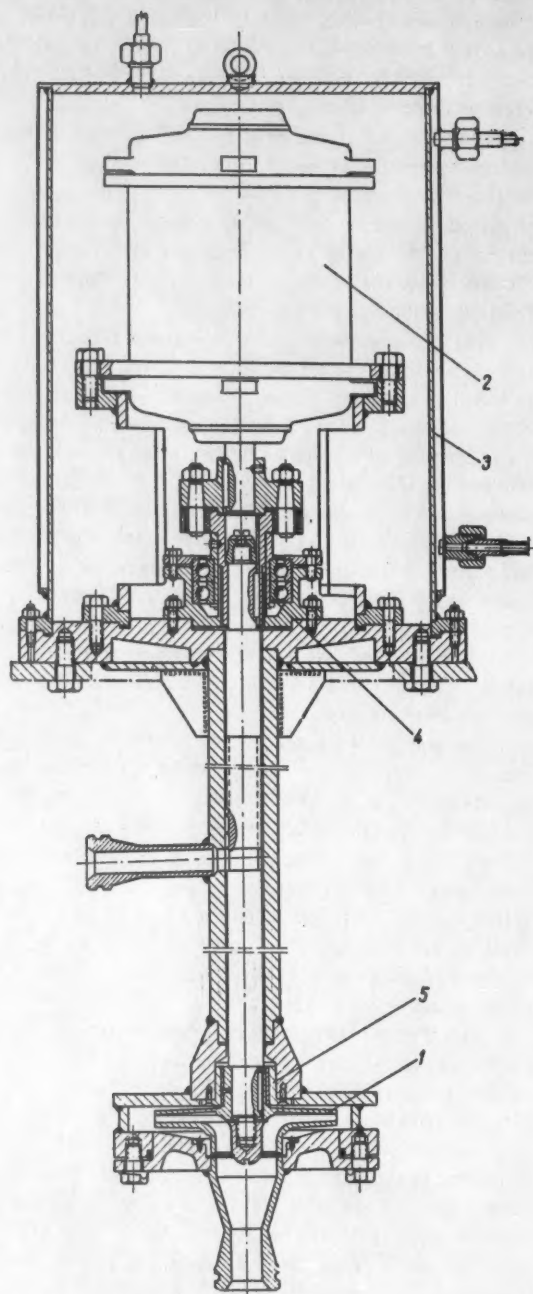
Centrifugal pump with a beryllium-bronze bearing and a standard electrical motor: 1) impeller; 2) electric motor; 3) casing; 4) journal-thrust bearing; 5) sliding bearing.
